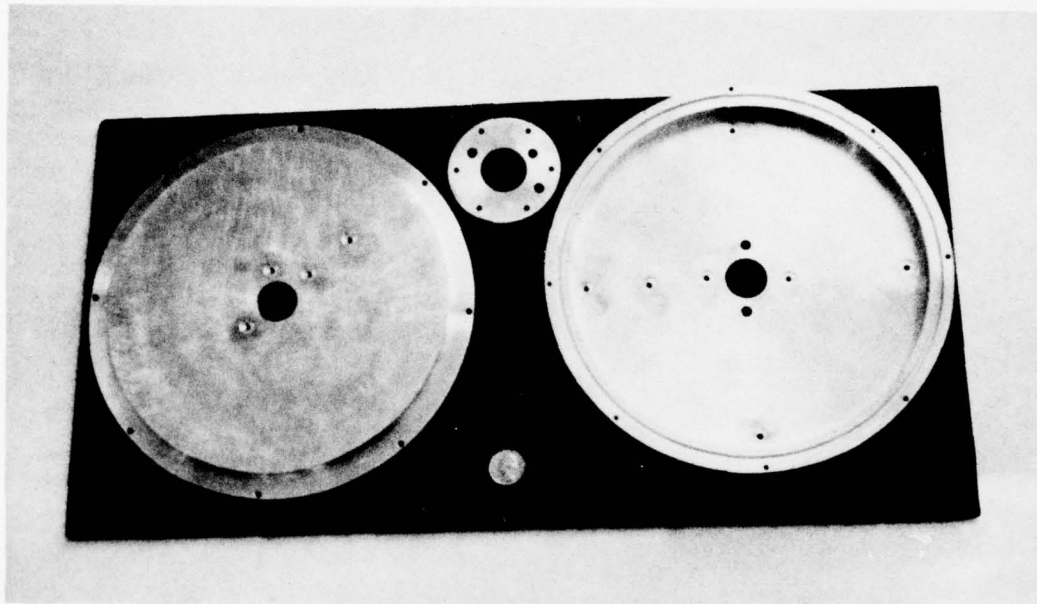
TWO DISK-SHAPED ALUMINUM PIECES FOR VACUUM CHAMBER ASSEMBLY.
